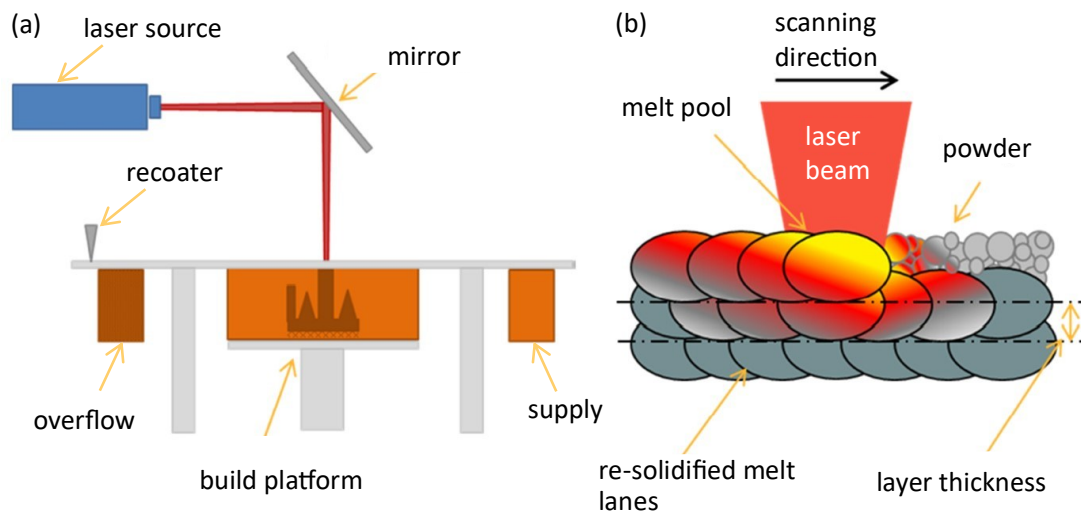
Schematic drawing of (a) a stereotypical LPBF machine and (b) LPBF melting track [26].
